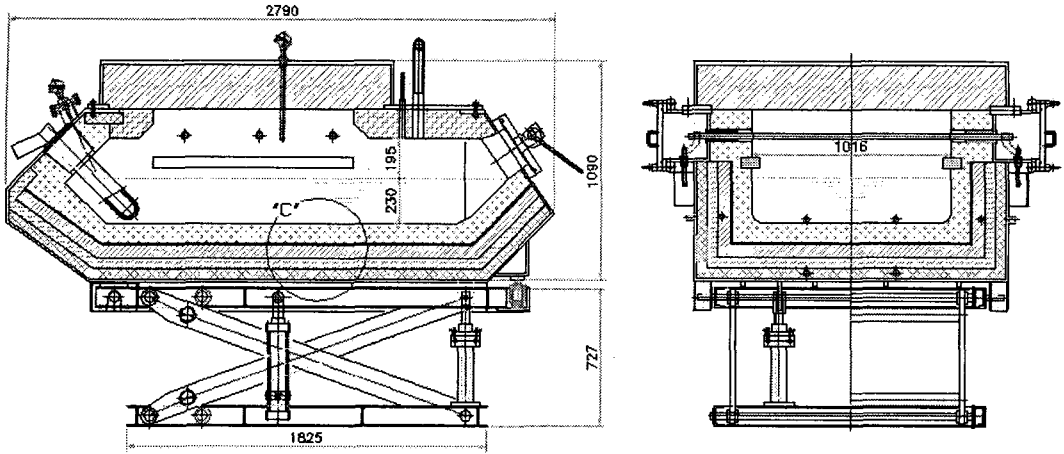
Drawing of holding furnace for molten aluminium alloy (unit : mm)
